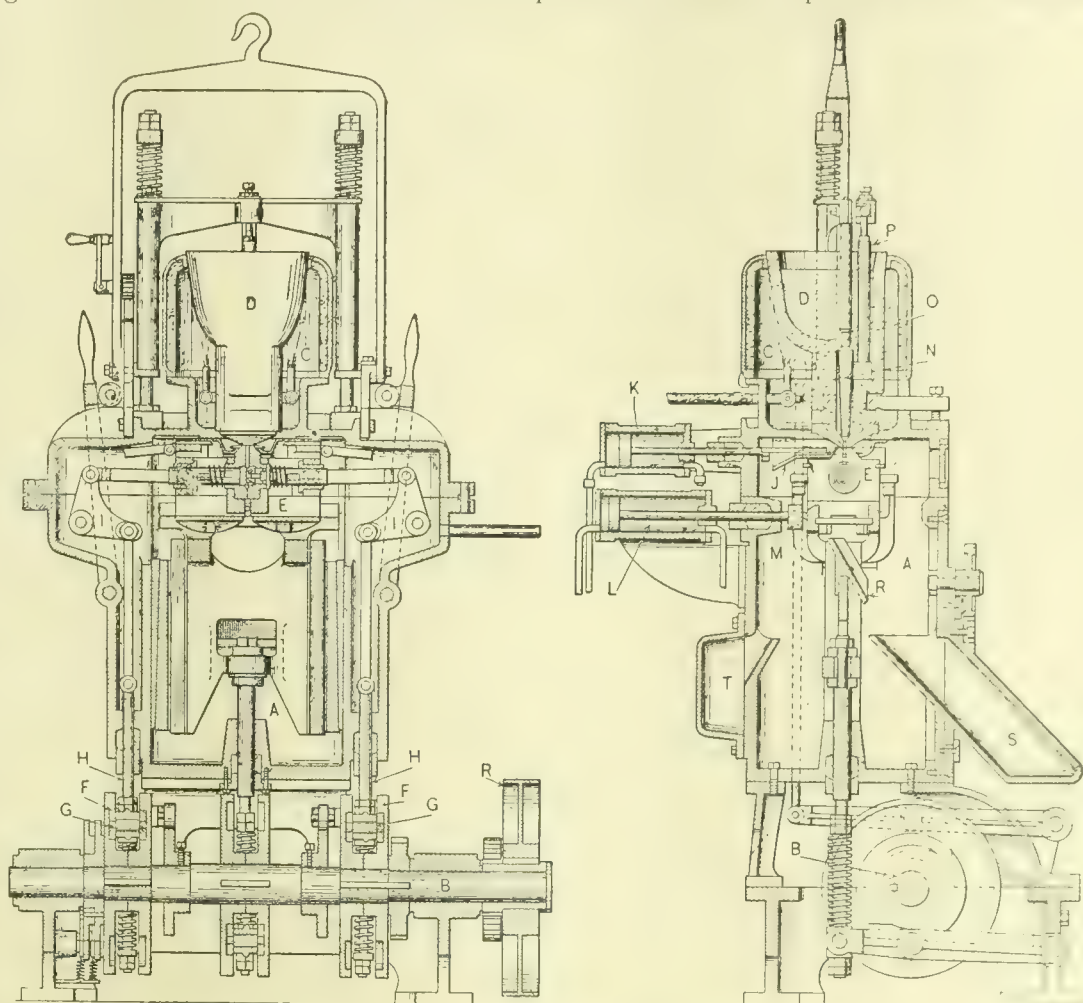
MACHINE WITH VACUUM CHAMBER IN WHICH THE DIE MOULD OPERATES AUTOMATICALLY.
